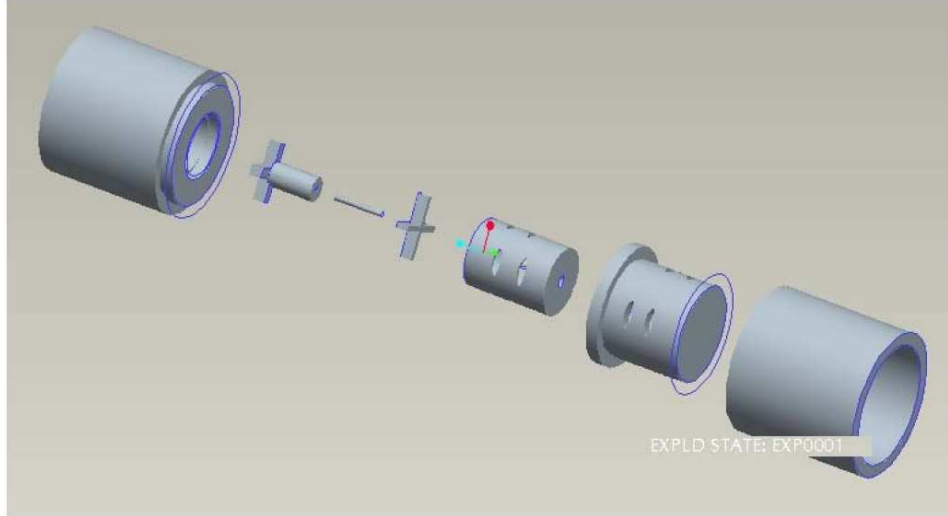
Exploded view of a 2 degree-of-freedom barrel valve [24].
